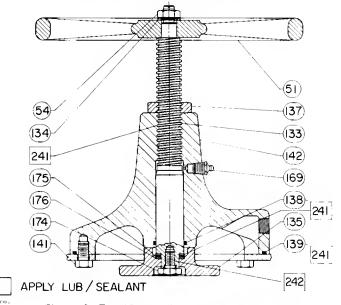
Top Mounted Handwheel Assembly for Size 70 and 87 Actuators
